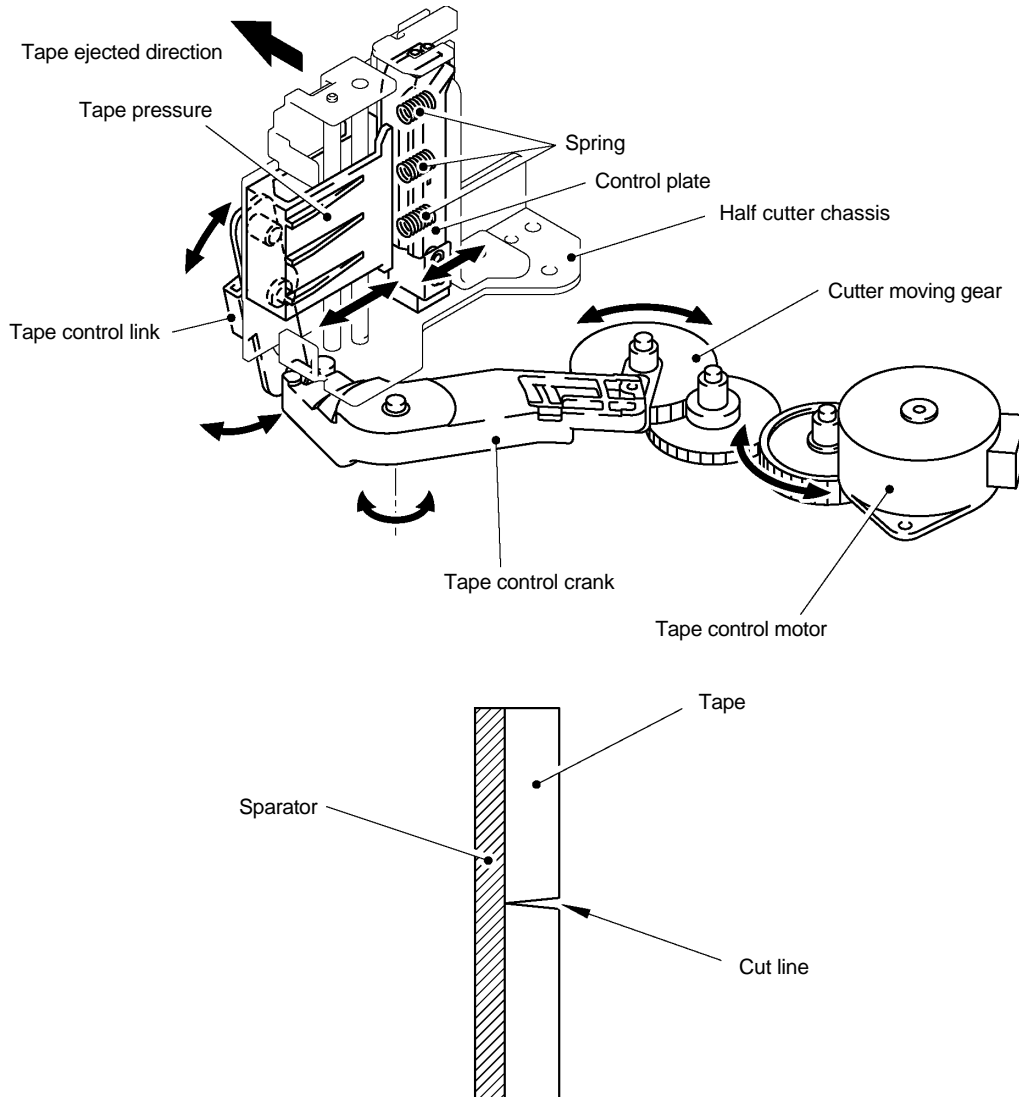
Tape Automatic Half Cutter Mechanism
